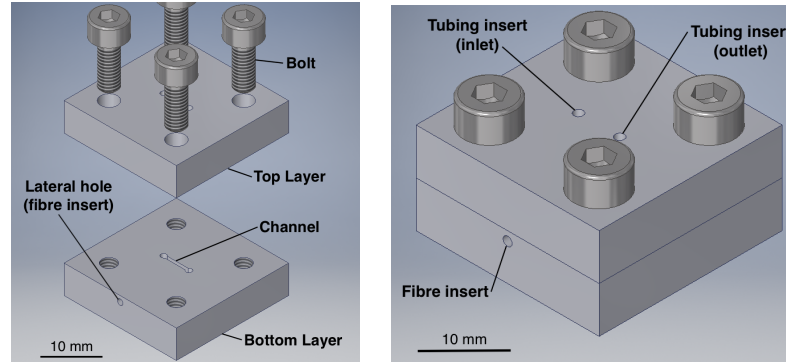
CAD models of device 1. (a) Unassembled; and (b) assembled.
